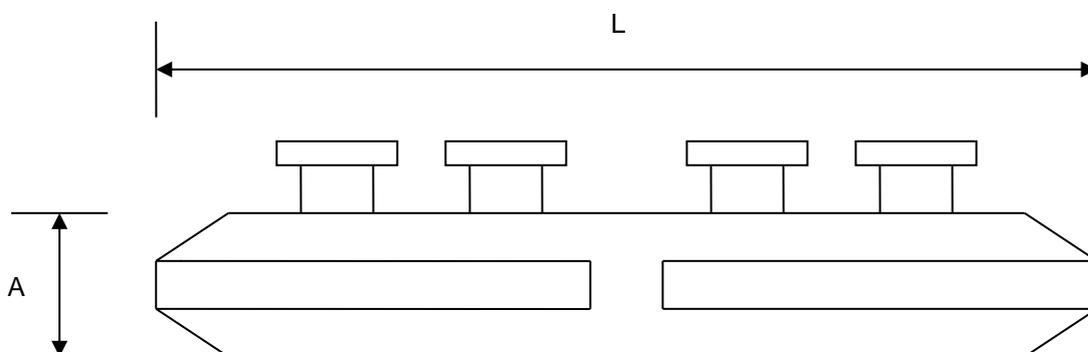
Typical arrangement of a mechanical torque shear connector ferrule
